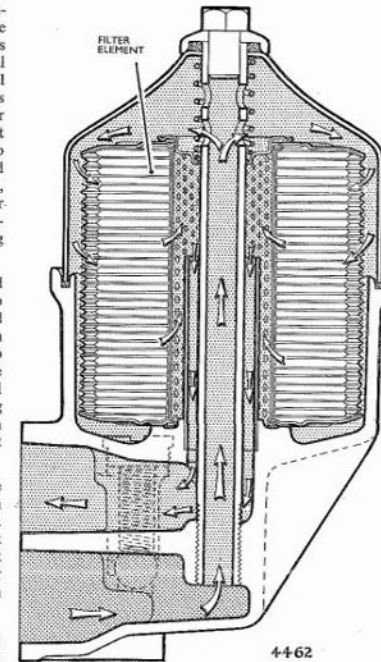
Sectional view of the oil filter, showing the oil circulation
